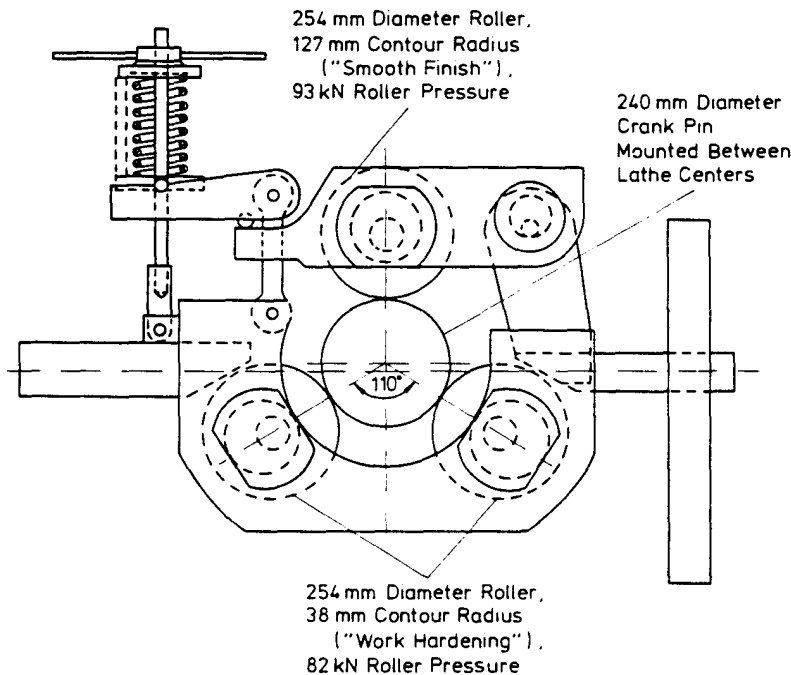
US-patented surface rolling equipment for shafts of large diameters
